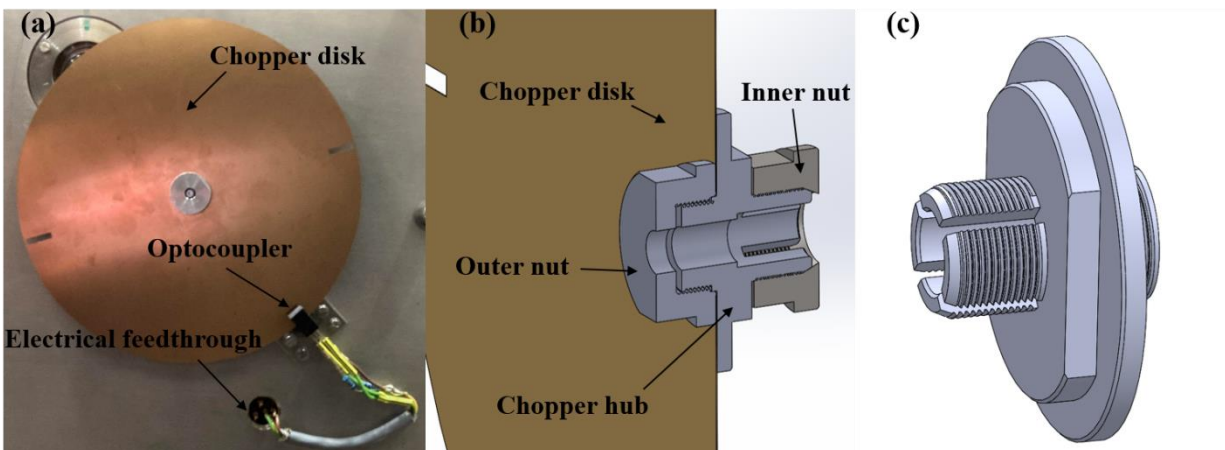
(a) Back of the skimmer mounting plate where the chopper disk and the optocoupler are located. The optocoupler is glued on a 25 x 20 mm rectangular plate which is bolted to the skimmer mounting plate. (b) Section view of the chopper disk and the hub assembly. The chopper hub has both sides threaded. On the outer side, the chopper disk is attached. The inner side connects to the motor shaft and the inner nut fixes the hub on the shaft. (c) 3D model of the chopper hub. Four slots are cut into the threaded tube for symmetric mounting of the hub with the chopper disk in order to prevent vibrations due to imbalance during fast rotation.
